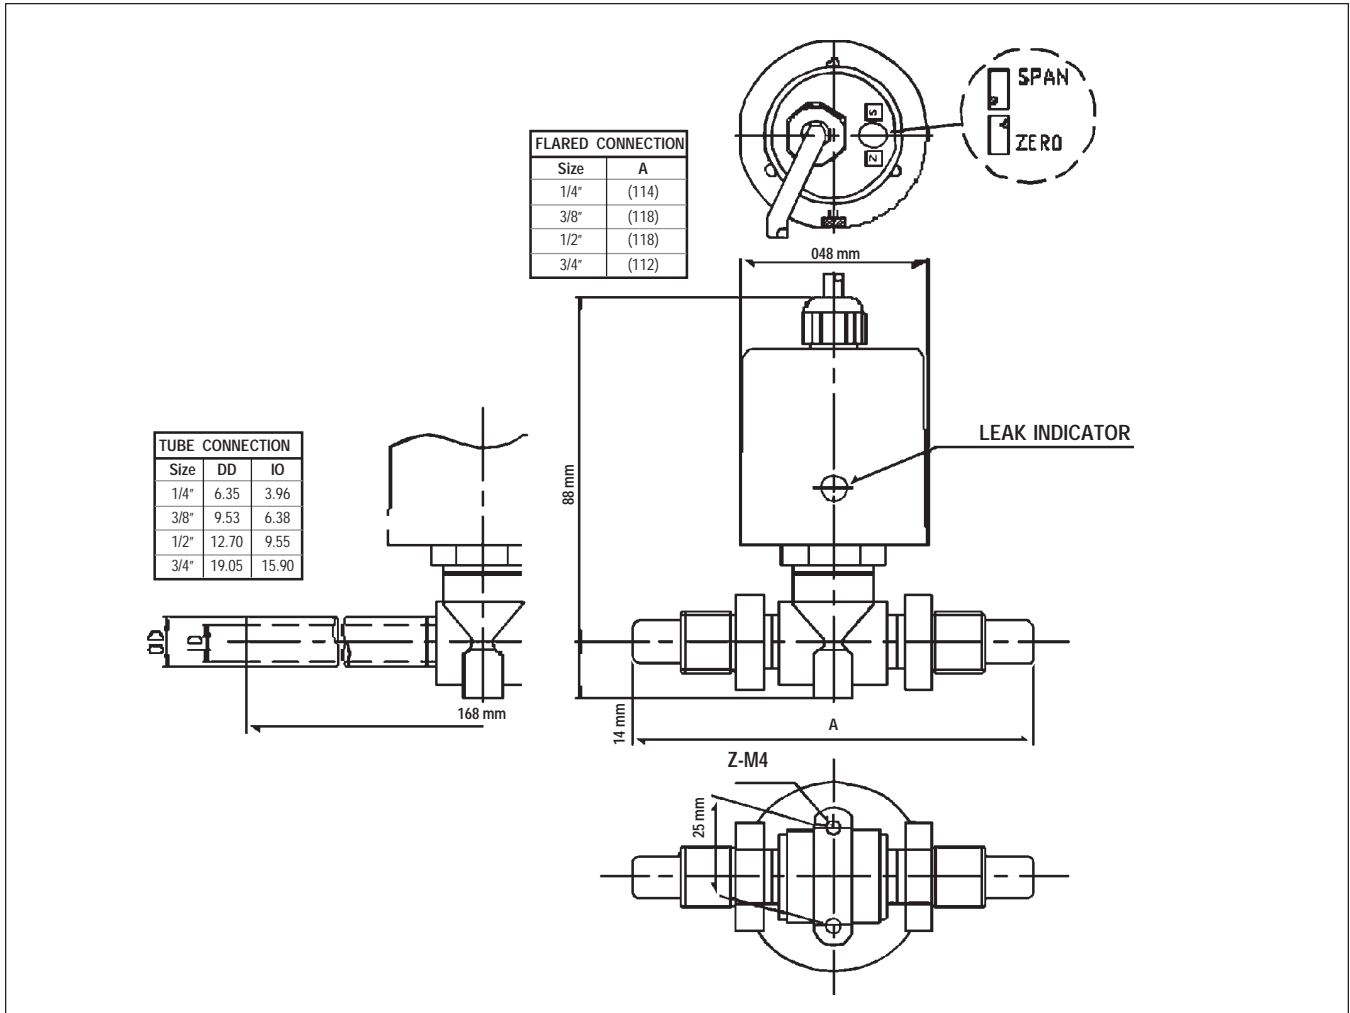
Dimensional Drawing of the Brooks® Model SFP33, Flow-Through Pressure Transmitter with Flare and Tube Process Connections.
